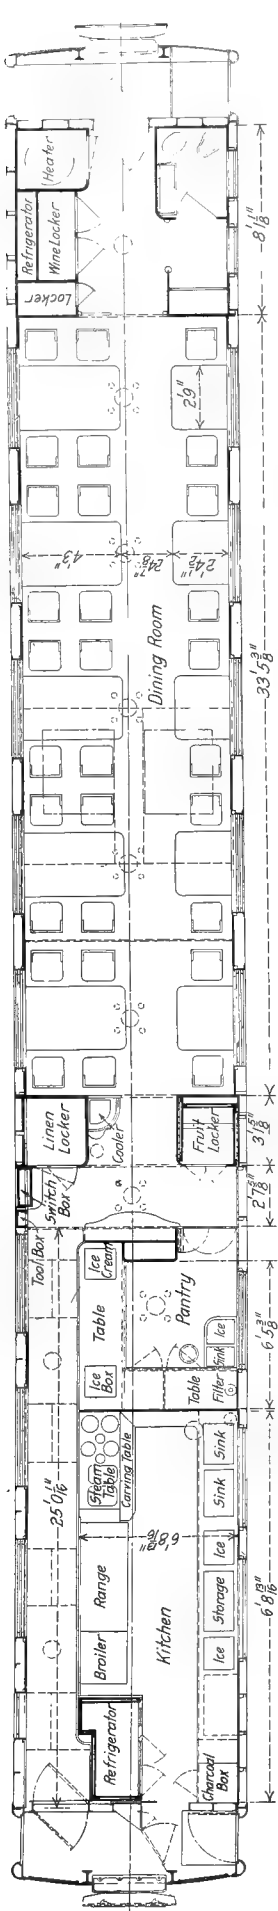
Floor Plan of Union Pacific Steel Dining Car. Builder, The Pullman Co.
